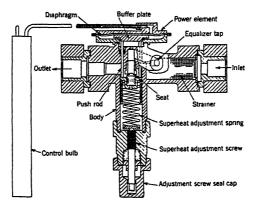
TYPICAL THERMOSTATIC EXPANSION VALVE
